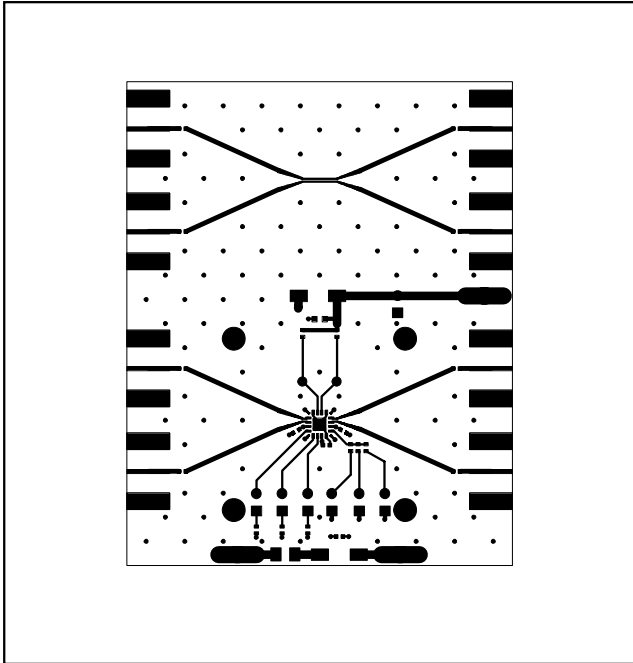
MAX3274 EV Kit PC Board Layout—Component Side
